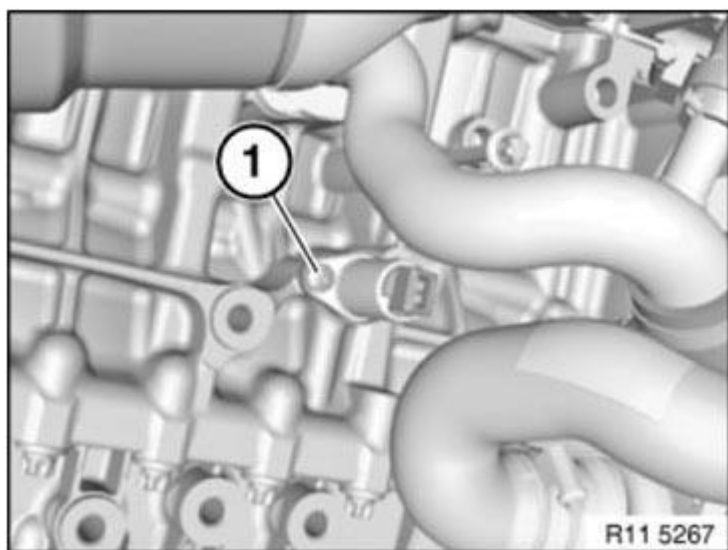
Identifying Hydraulic Valve Mounting Screw
